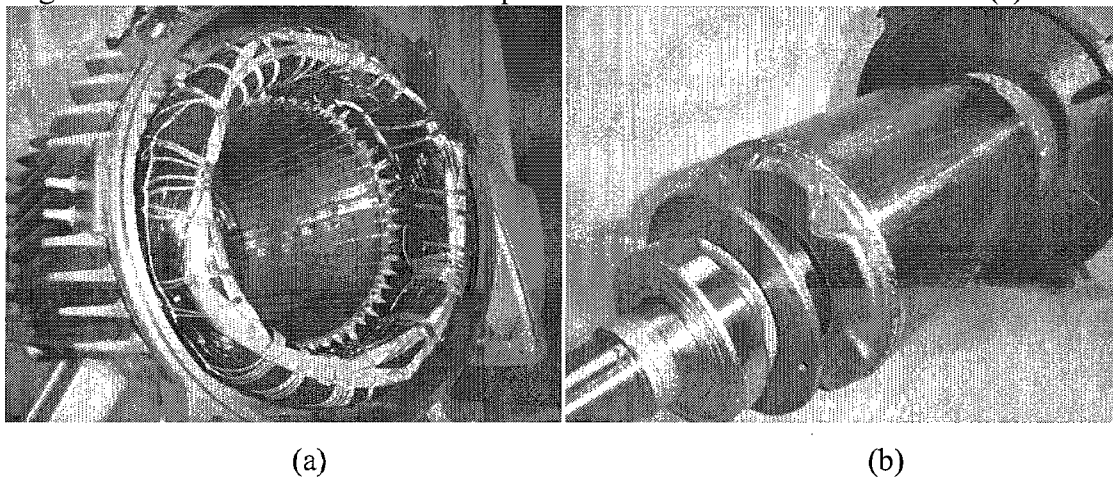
Cross sectional view of 7.5 hp copper-rotor induction machine. (a) Stator. (b) Rotor.
